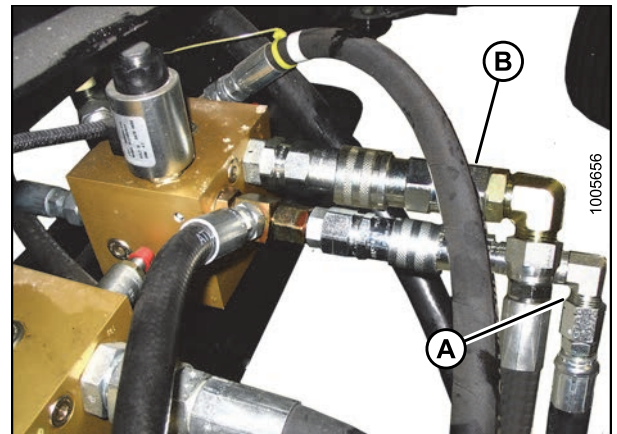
Auger/Reel Pressure and Auger/Reel Return Valve Block Receptacles
